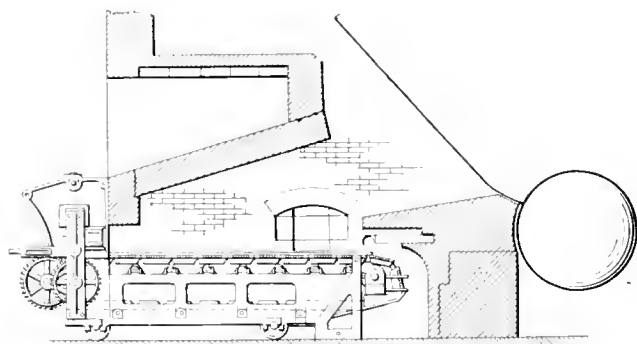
REVISION OF FURNACE SHOWN IN FIG. 2
